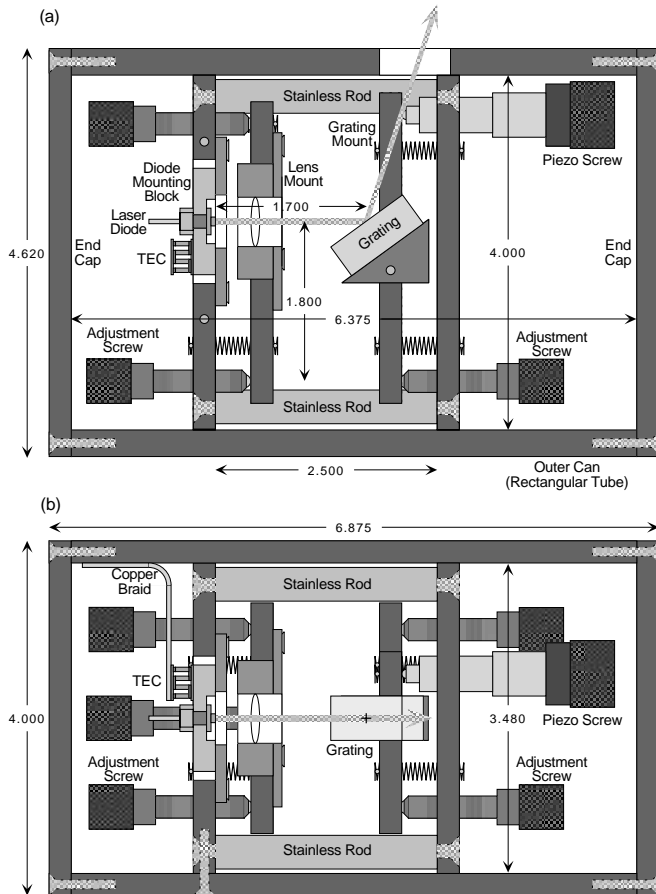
Cutaway views of the external cavity and can from the bottom (a) and side (b) [dimensions in inches].
